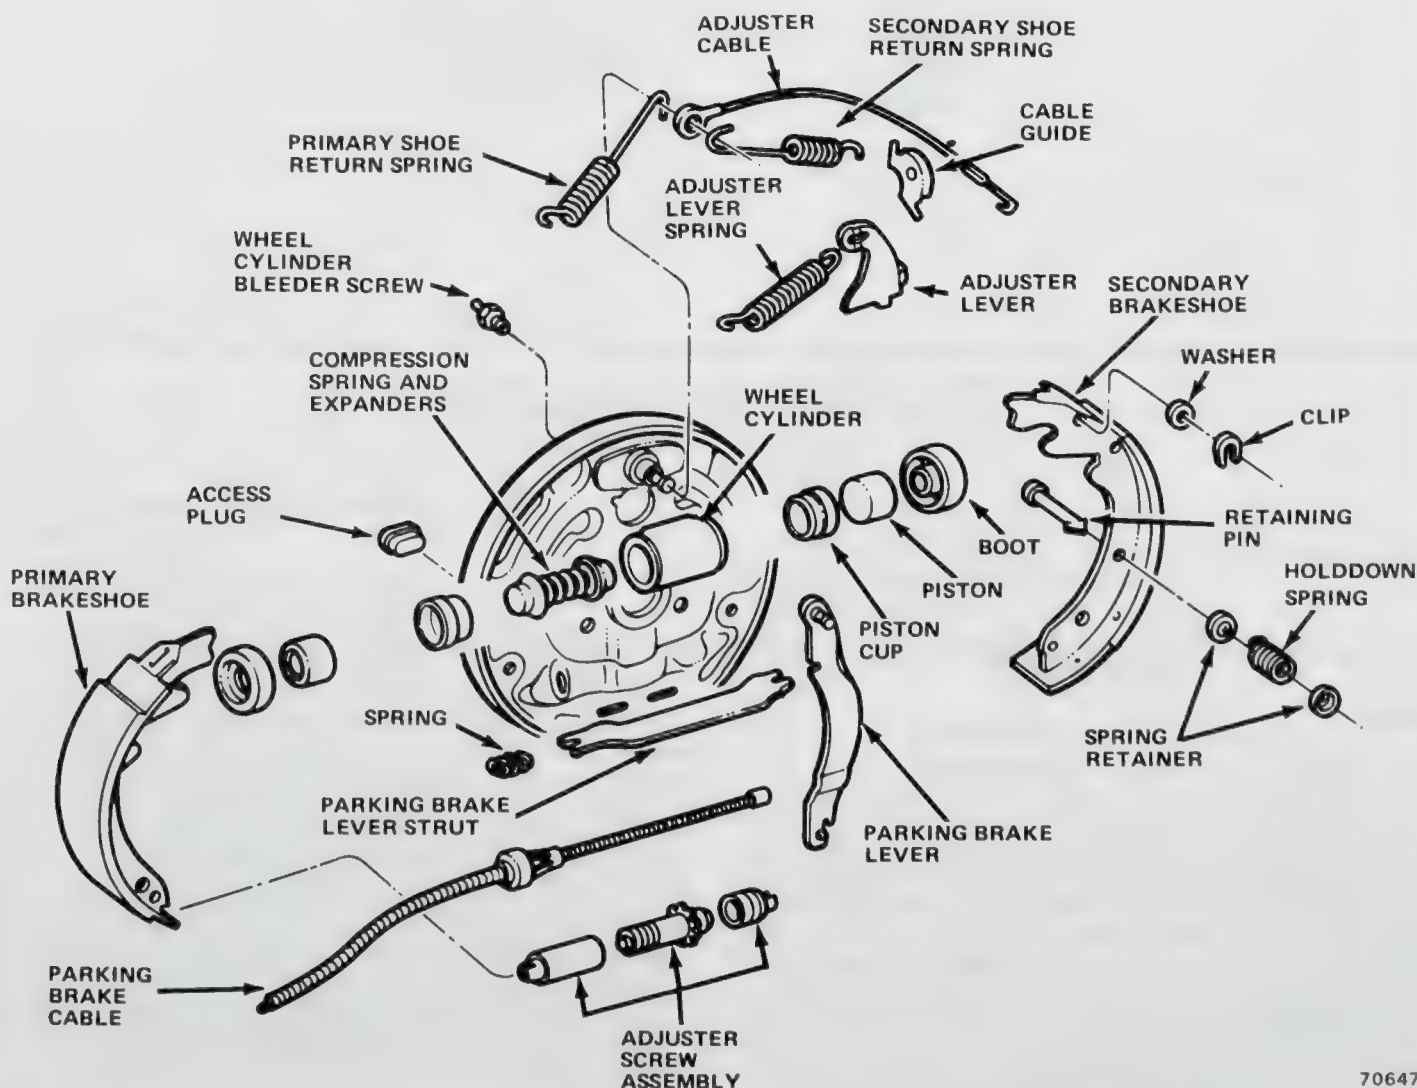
F-41 9-Inch Rear Drum Brake Assembly
